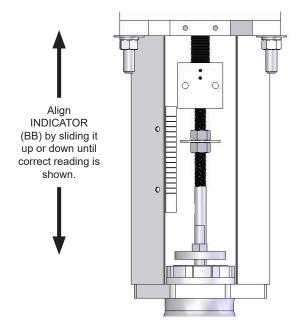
After adjustment, fully tighten Indicator Jam Nuts to ensure subsequent accurate readings
